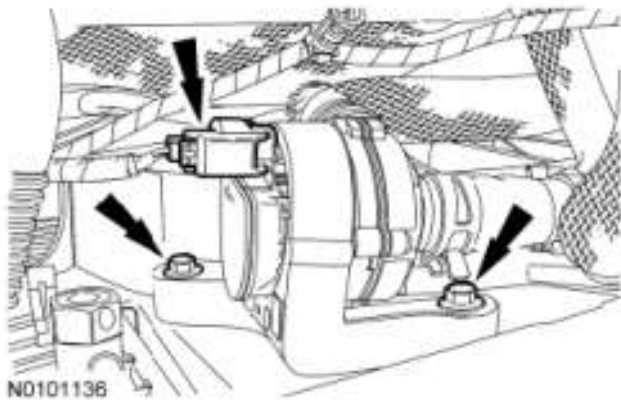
Locating Auxiliary Coolant Pump Electrical Connector And Bolts
